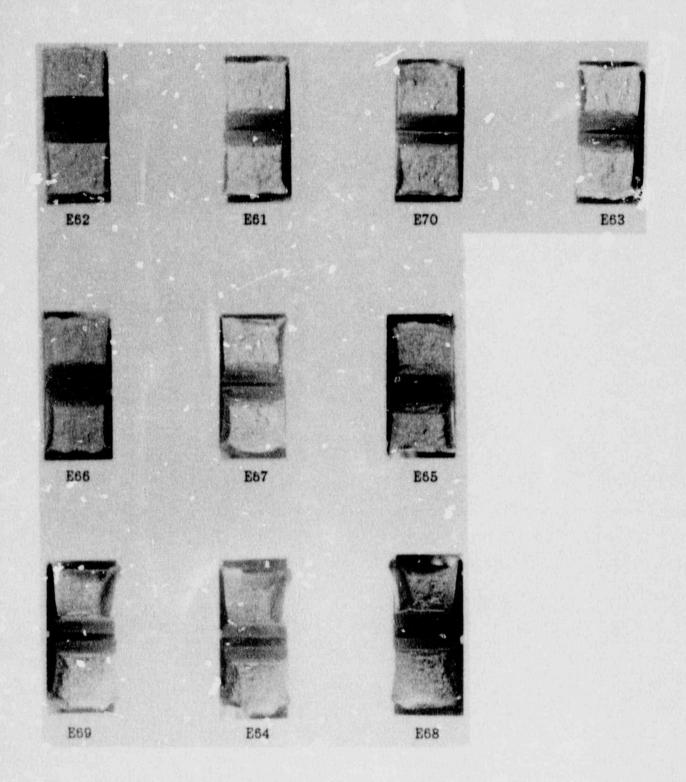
CHARPY IMPACT SPECIMEN FRACTURE SURFACES FOR ZION UNIT 2 REACTOR VESSEL SHELL PLATE C4007-1 (LONGITUDINAL ORIENTATION)
